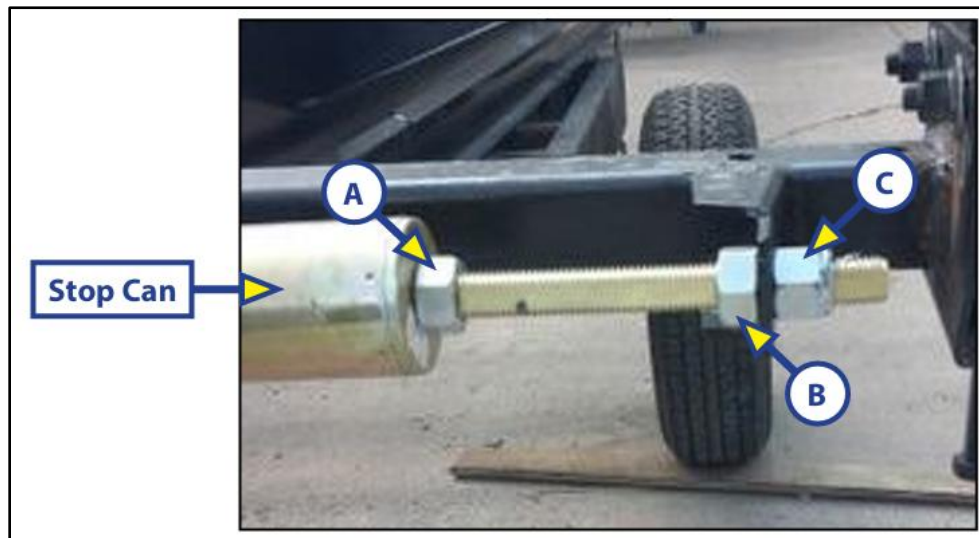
Electric slide-out IN and OUT adjustment components on the actuator.
